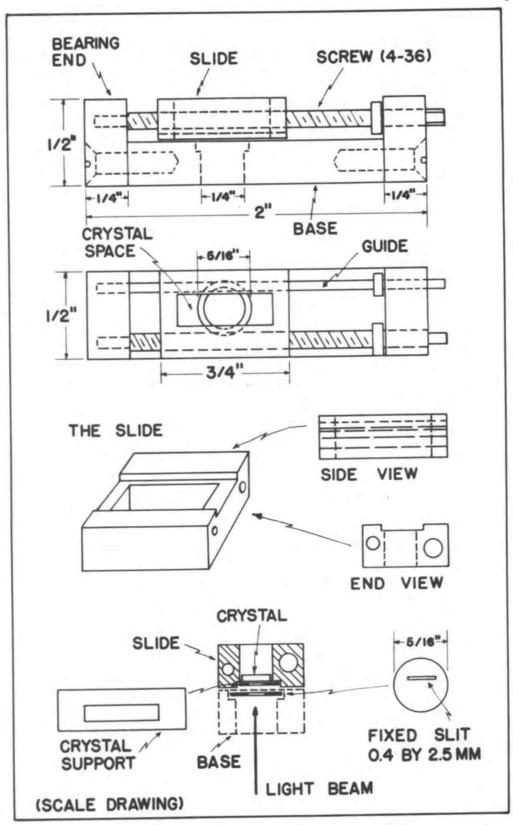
CRYSTAL HOLDER WITH MOVABLE MOUNT.
